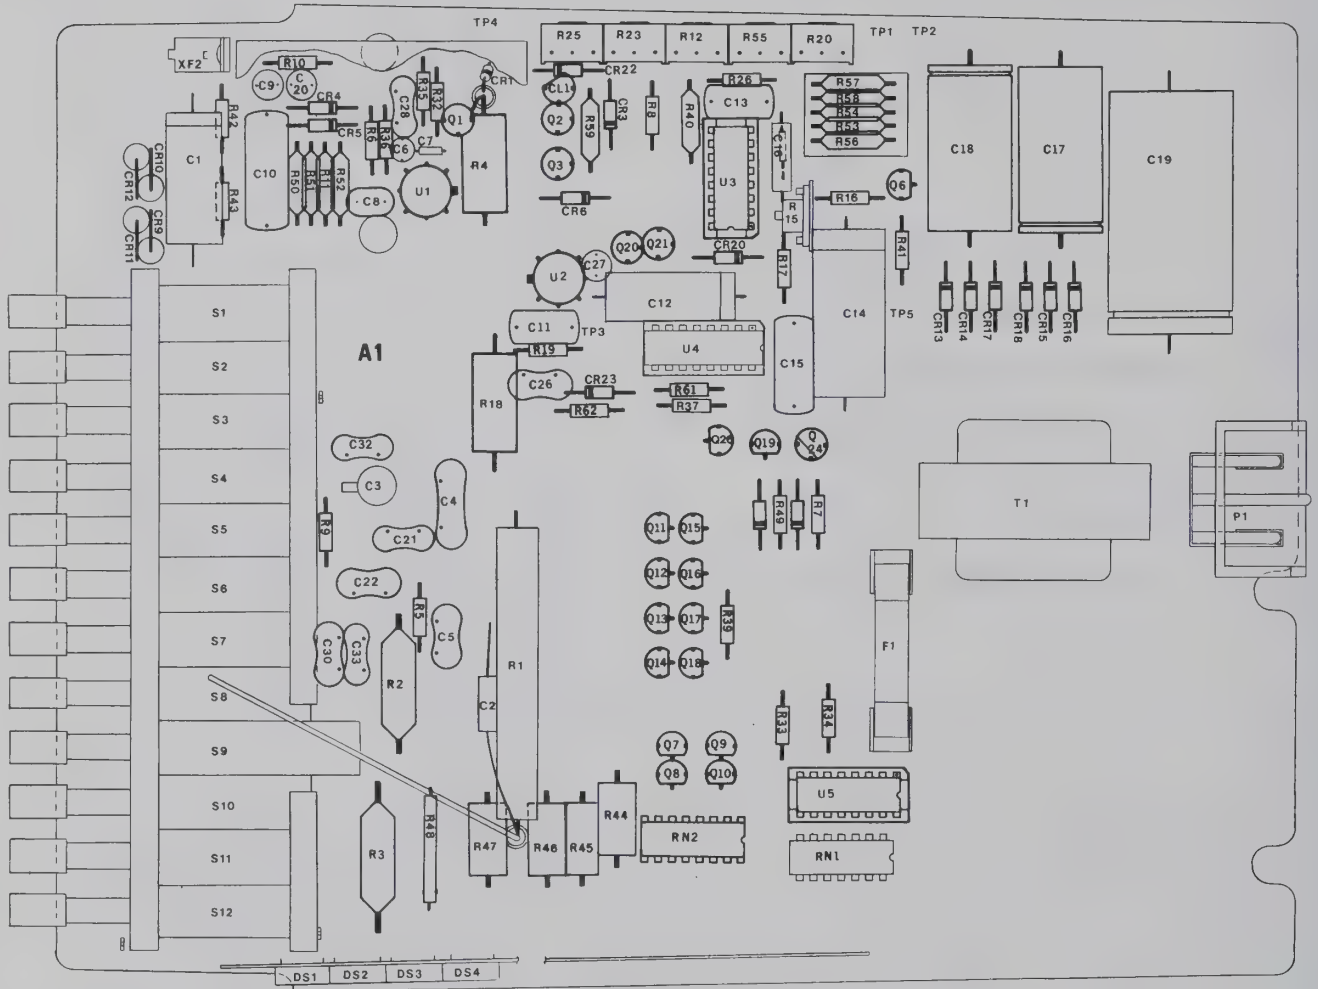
8000A MAIN PCB ASSEMBLY
